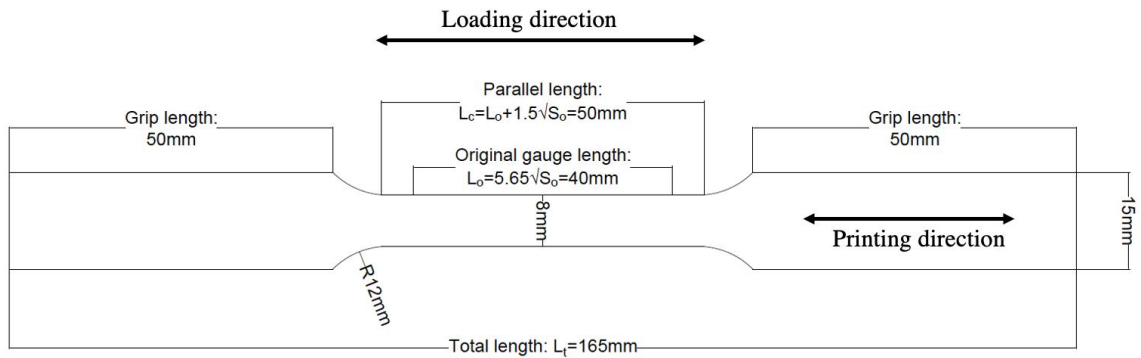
Coupon dimensions determined by EN ISO 6892-1 [9]
